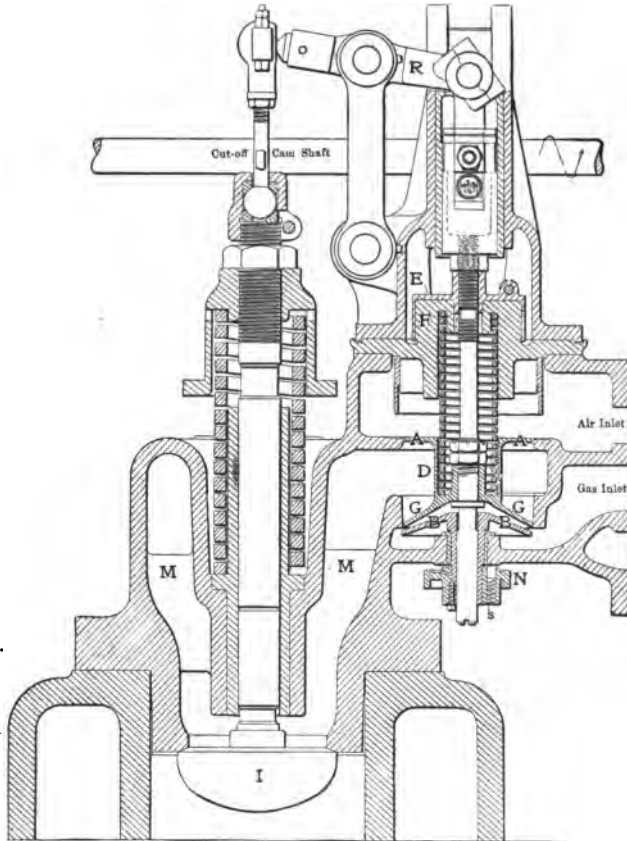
SECTIONAL ELEVATION OF INLET AND CUT-OFF VALVES AND MECHANISM.
